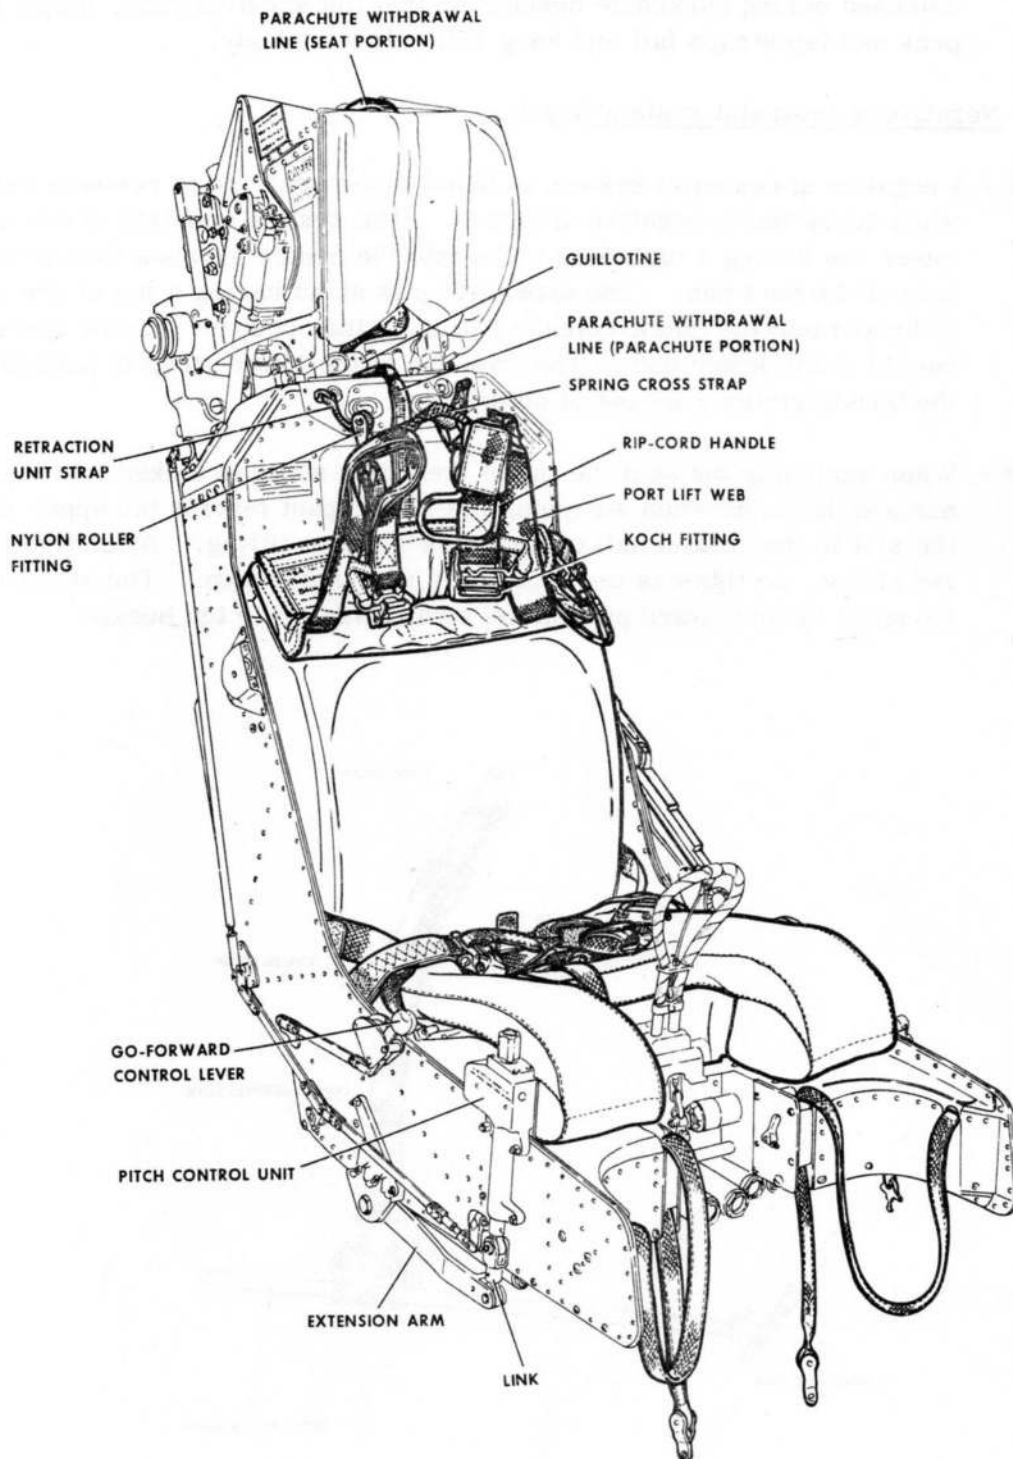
Type 9B Mk 2 Ejection seat equipped (starboard view)
